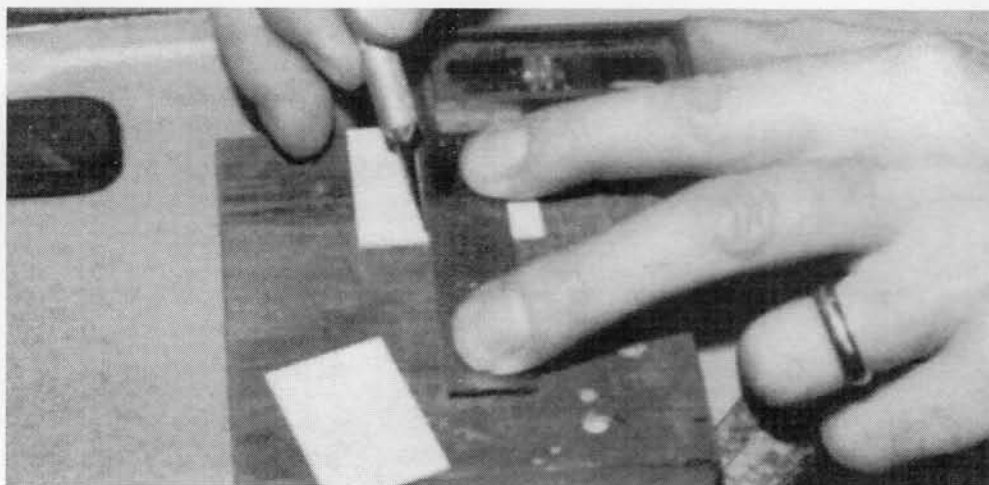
& No. 5 - To cut plastic sheets, measure to size, scribe with X-acto knife several times and then bend and break (like cutting glass).
